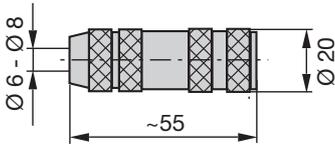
Connector BKS-S103-00 (socket) for BUS IN
